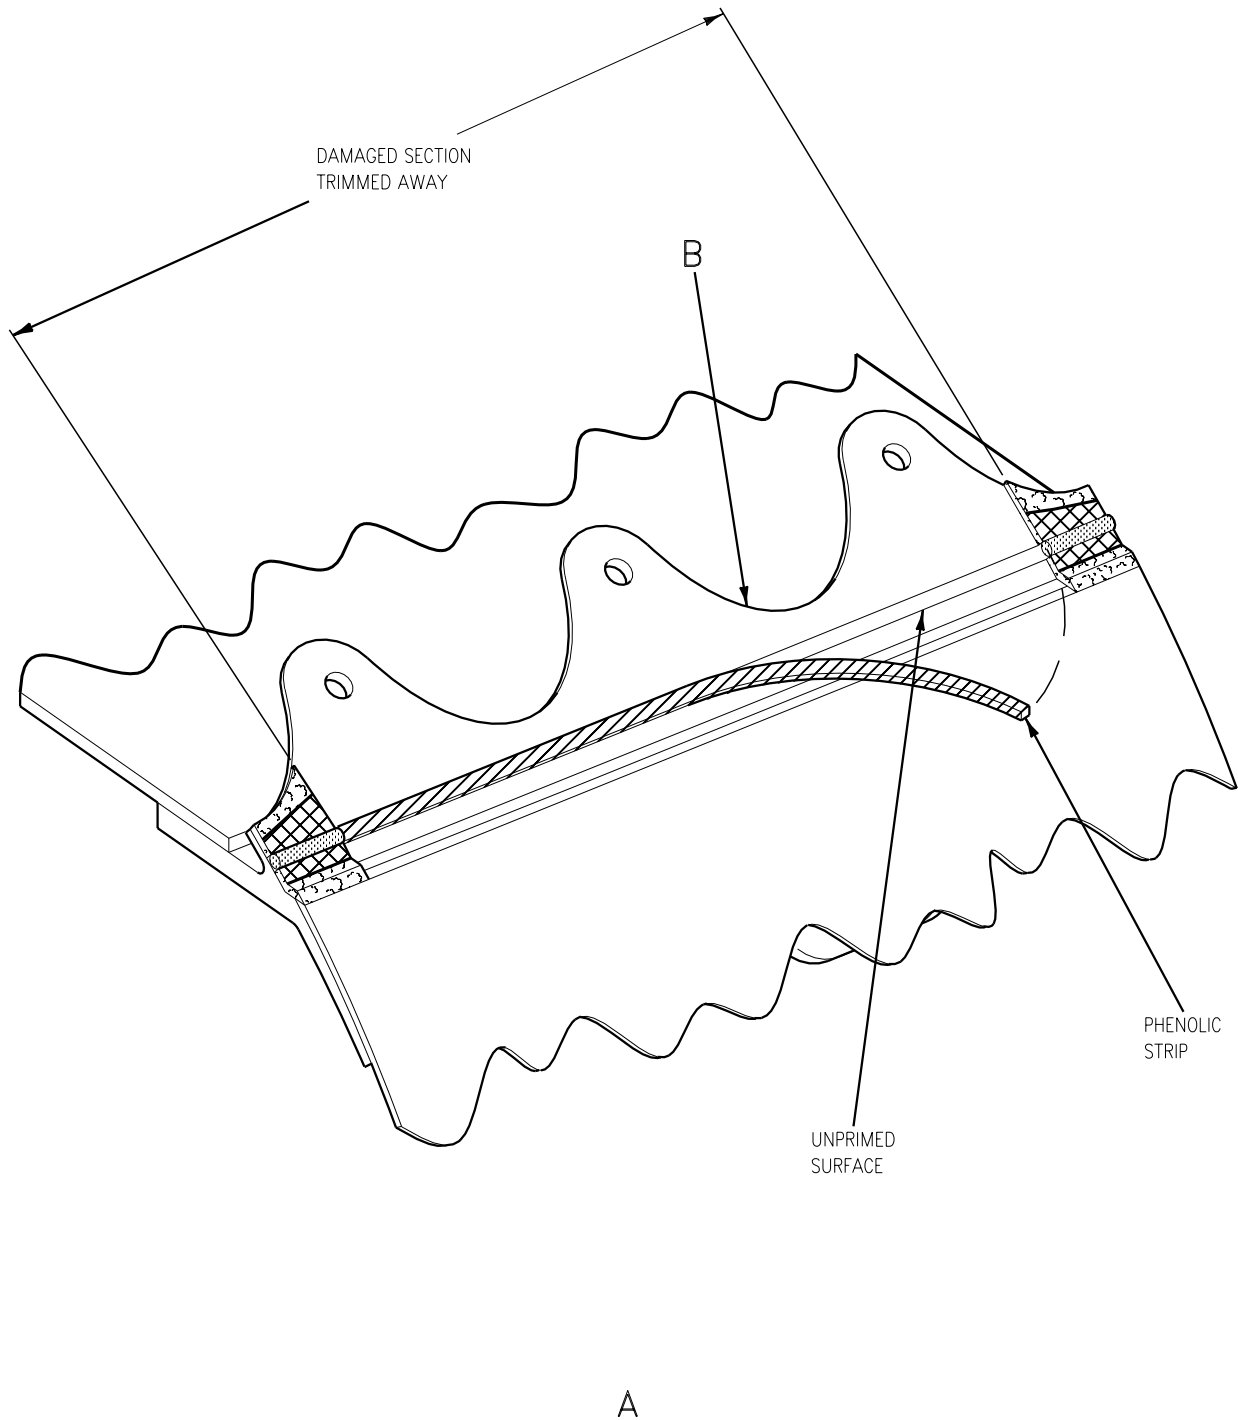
Form In Place Seal Damage More Than 0.80 Inch (Sheet 2)
